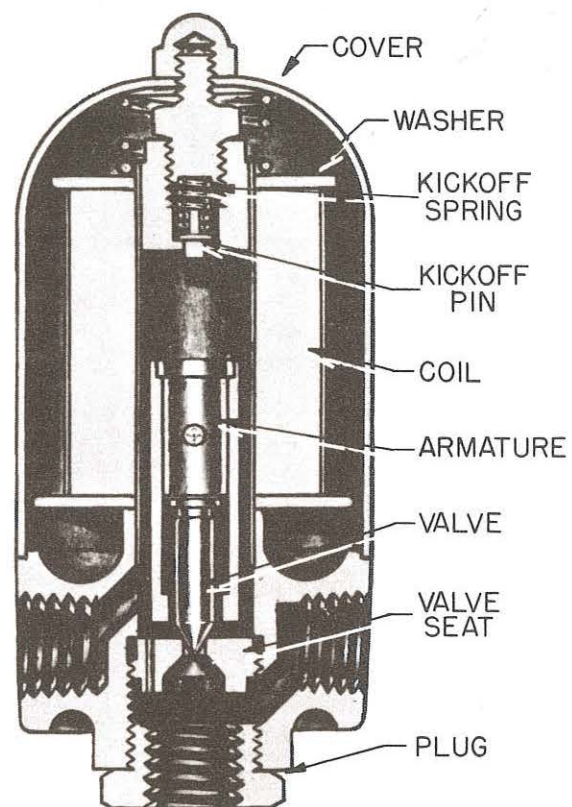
No. 7-105,904 Air Solenoid Valve.
